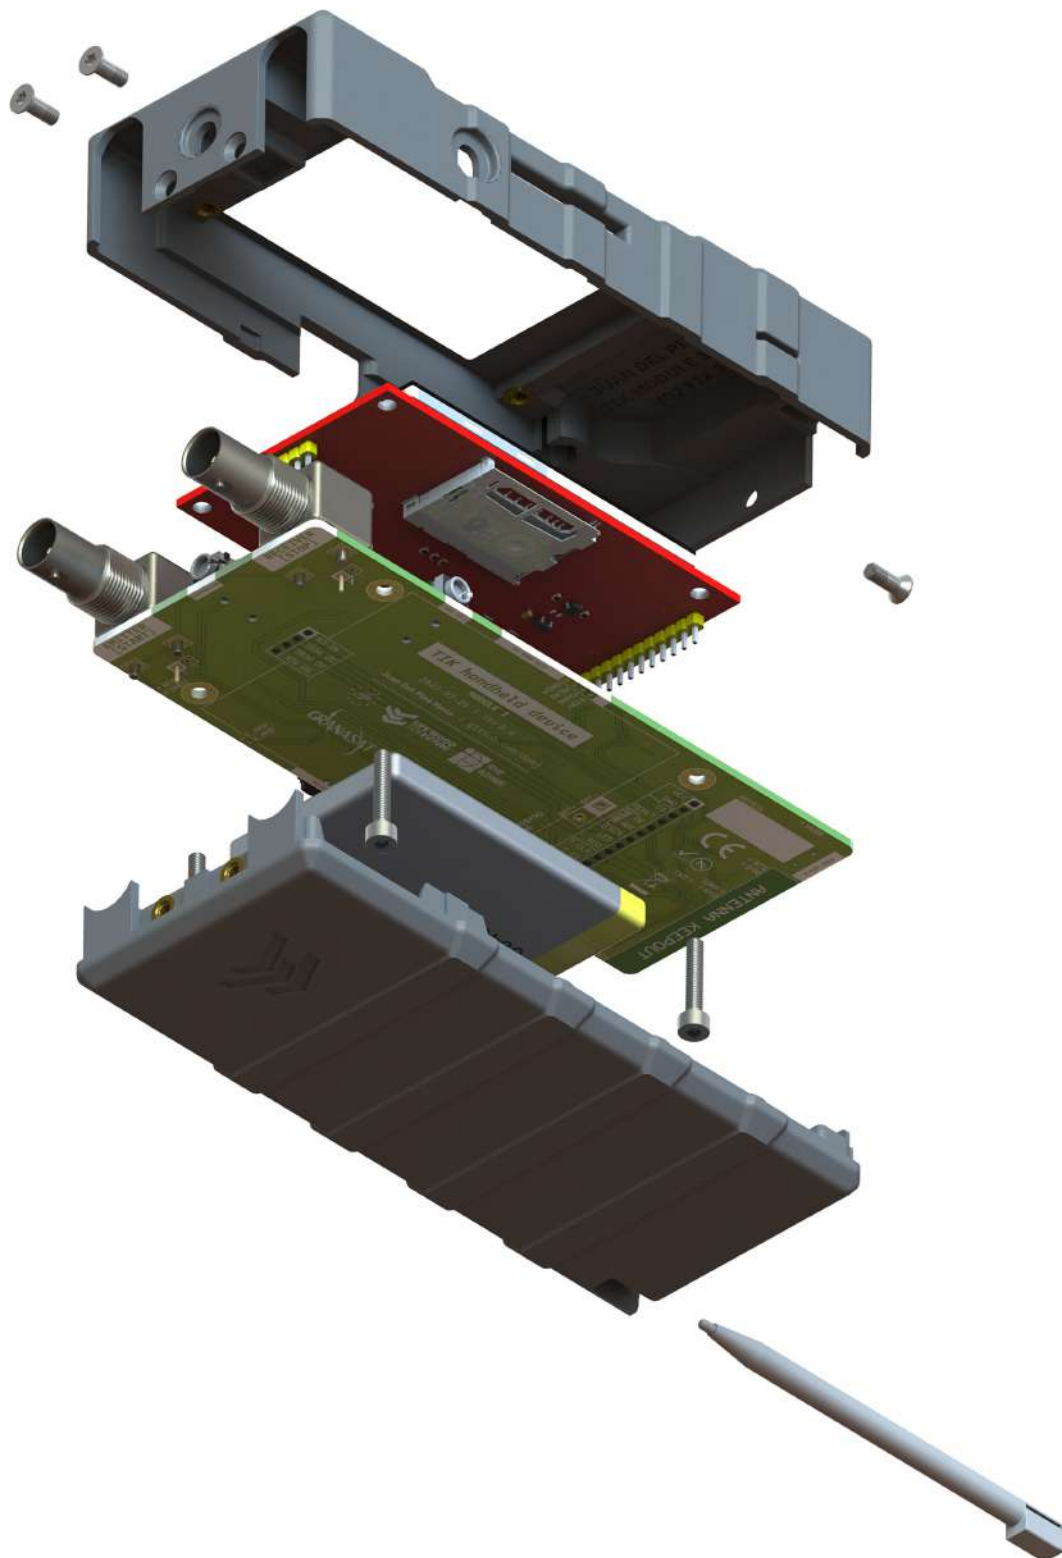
Bottom-side exploded view render of the complete assembly.
